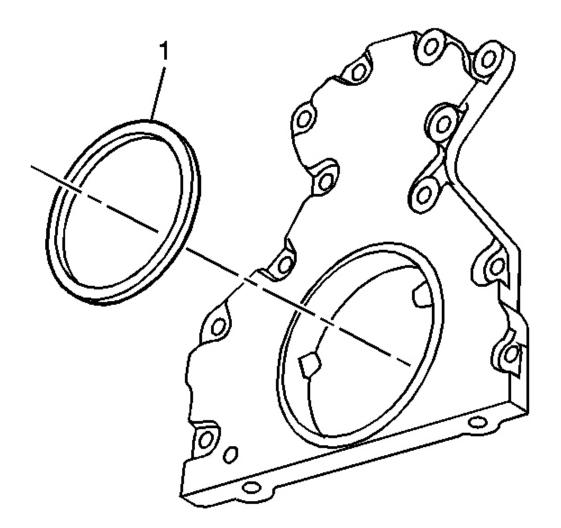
View Of Crankshaft Rear Oil Seal Courtesy of GENERAL MOTORS CORP.
